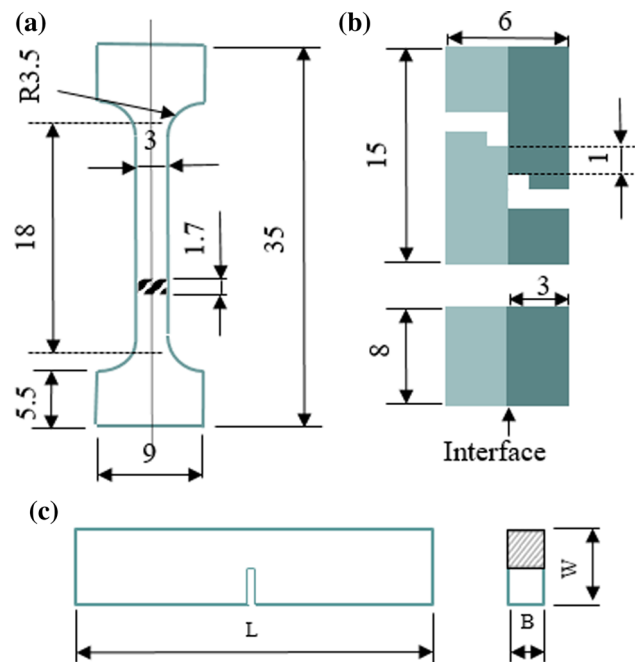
Shape and size of the specimens used for (a) tensile test of TiC-Fe cermets and TiC-Fe/Fe BCs; (b) interlaminar shear test of bilayer composites; and (c) fracture toughness of TiC-Fe cermets (unit: mm)
